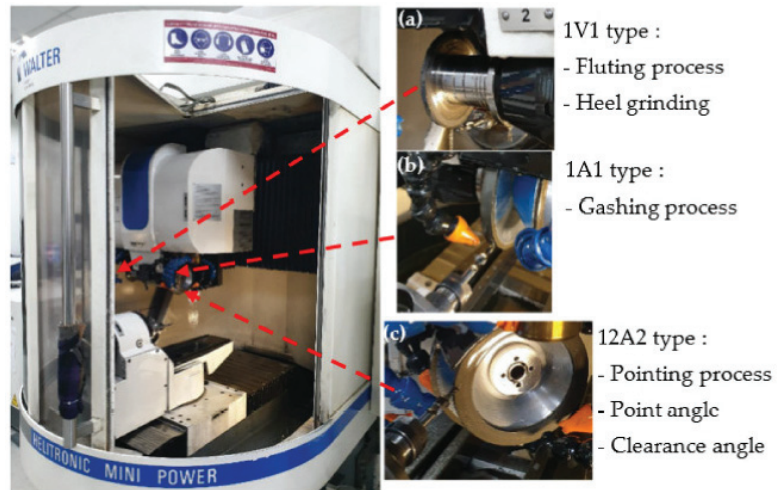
Location of grinding wheel for the tool fabrication: (a) fluting wheel, (b) gashing wheel, (c) clearance/point angle wheel.
